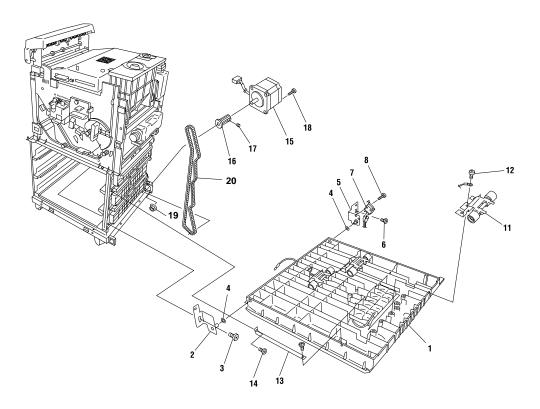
Paper Path Transport Assembly Parts Locational Diagram
